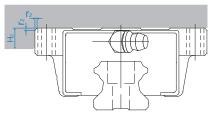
Dimensional tolerance between contact datum plane and mounting hole
